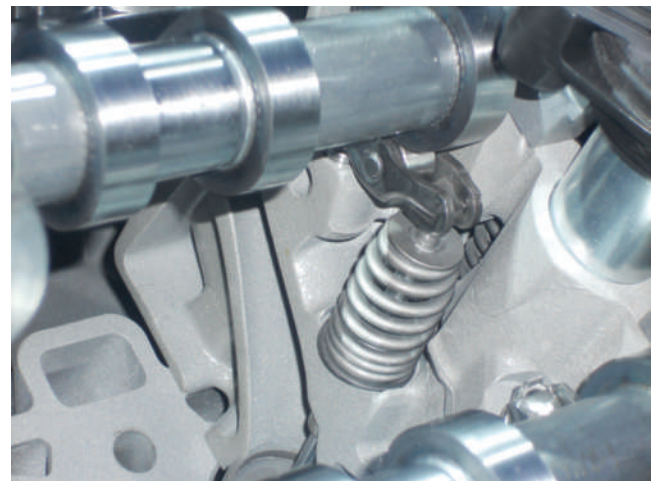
The camshaft in this setup rides on a rocker arm that has a hydraulic lash adjuster.
